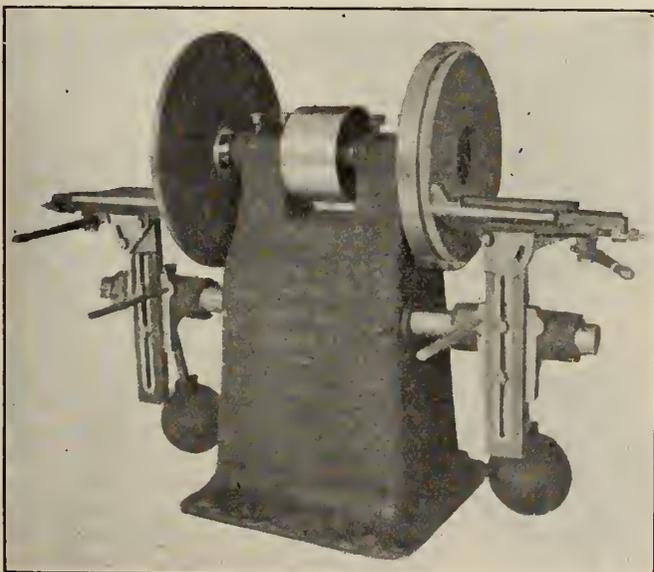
NO. 17 GRINDER WITH 24-INCH DIAMETER WHEEL.
